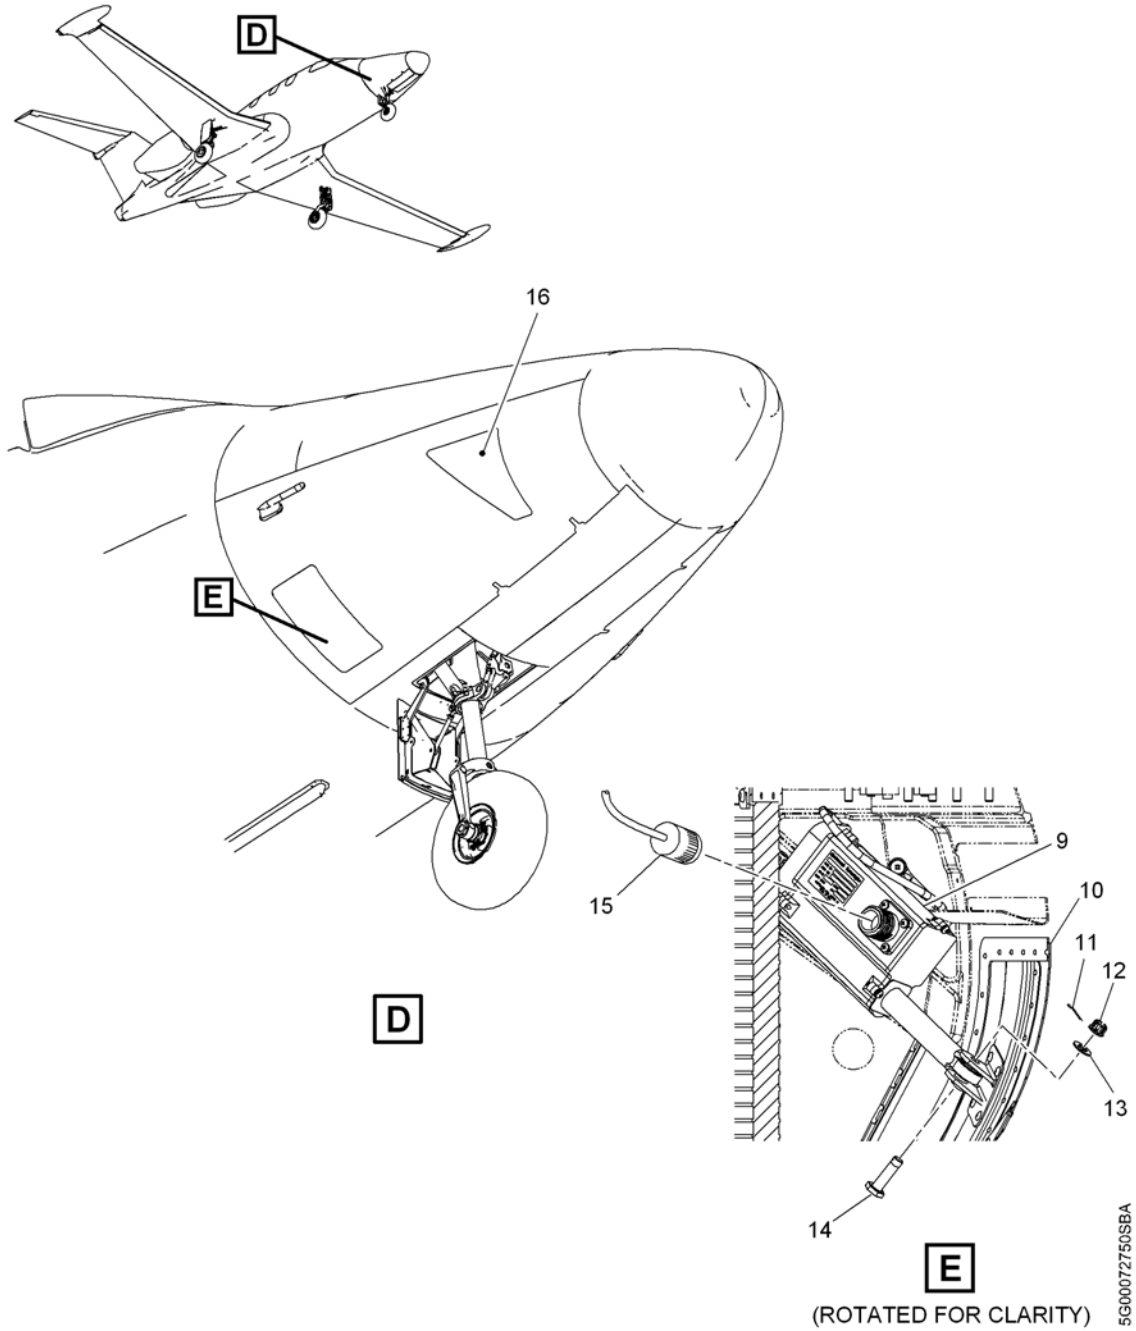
Initial Set-Up Before Removal and Installation of Pitot/AOA Assembly (Sheet 2 of 4)
